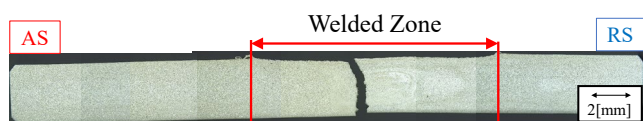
Macrostructure of tensile fractured smoothed specimen of ADC12 similar joint
